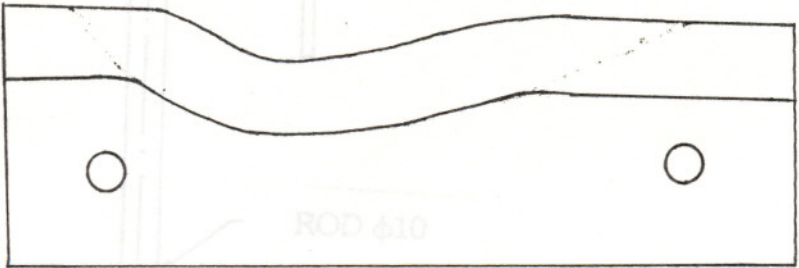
CHIPPING DISC WITH BLADE ATTACHMENT
